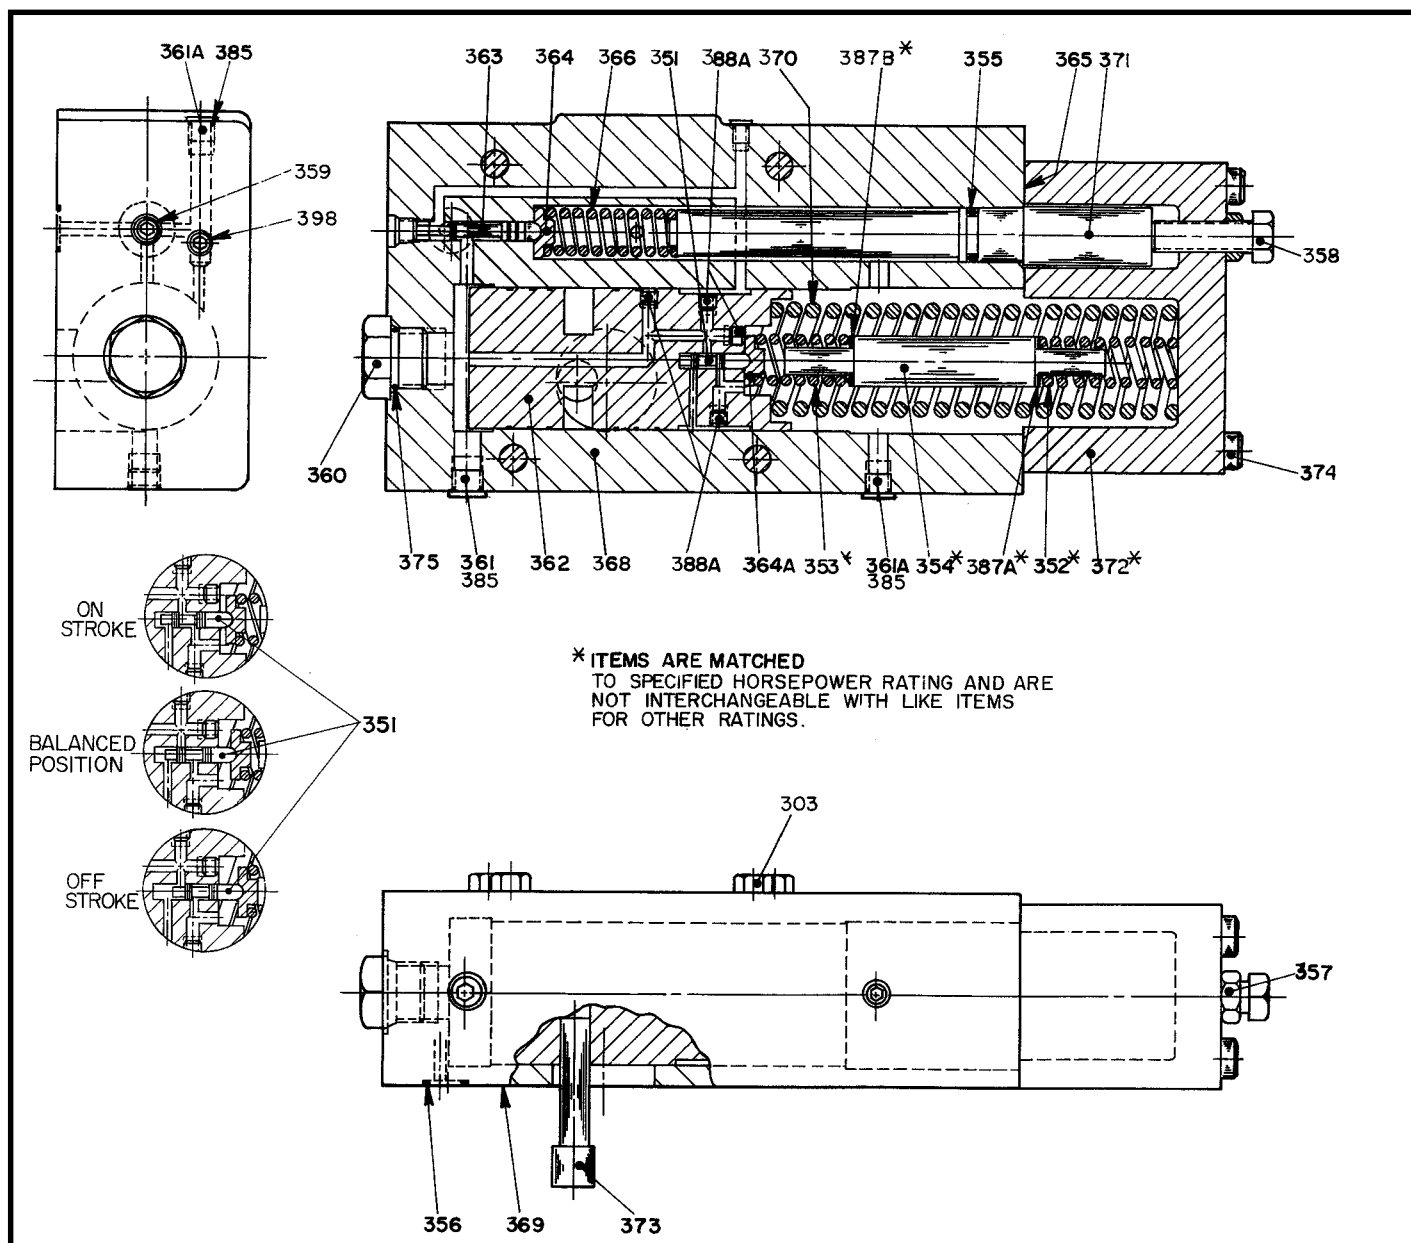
Parts Drawing, Oilgear Type "HP" Control (510335B).
